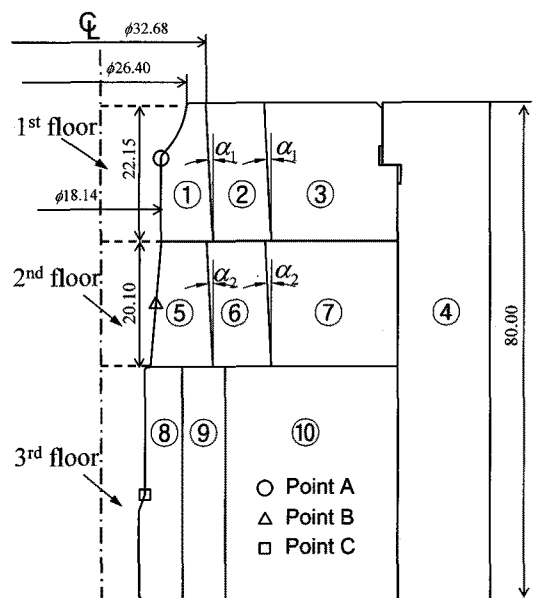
Lower die design of the last stage in ball-stud cold forging
